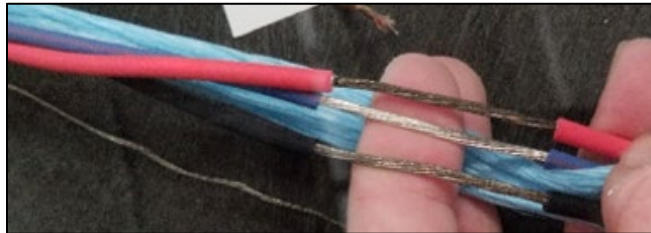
Insulation removed from 2-inch section of wires to expose the copper conductors within.
